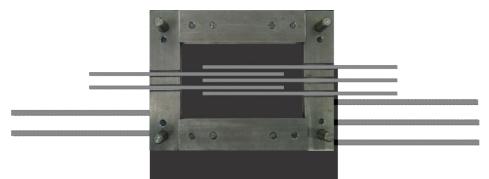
B. Bottom rubber cover and cords positioned in H-Block mould
